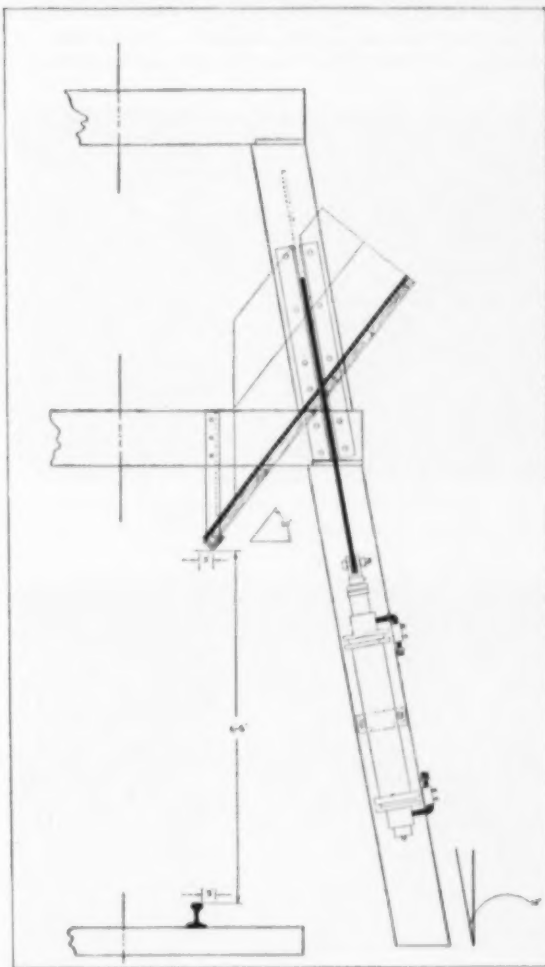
Assembly drawing of guillotine-type chute gate installation.
